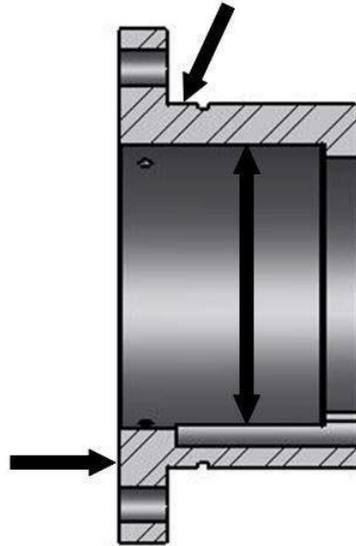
Inspection areas - Group 4 bearing housing
